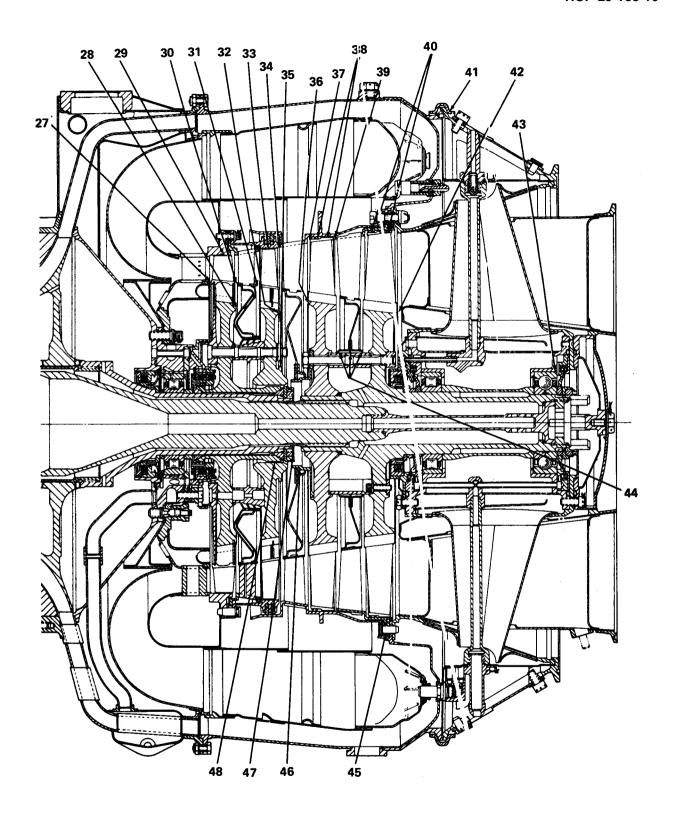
Fits, Clearance and Backlashes (T53-L-13B/703 Engines) (Sheet 3 of 4)
